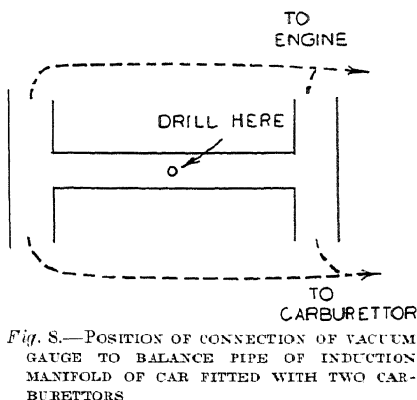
POSITION OF CONNECTION OF VACUUM GAUGE TO BALANCE PIPE OF INDUCTION MANIFOLD OF CAR FITTED WITH TWO CARBURETTORS
